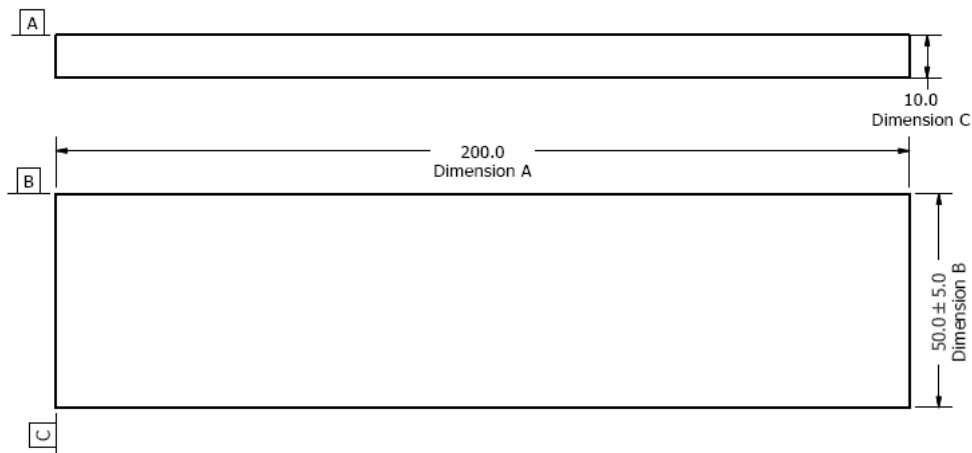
Engineering drawing of Block 1 with datums.
